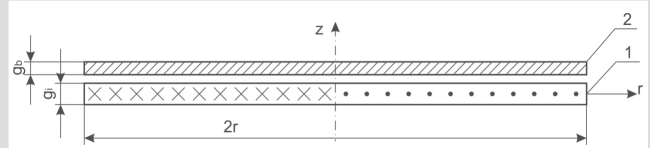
Coil – stamped sheet system scheme: 1 – coil, 2 – sheet
